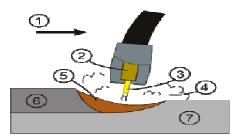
Operation of Gas Metal Arc Welding
